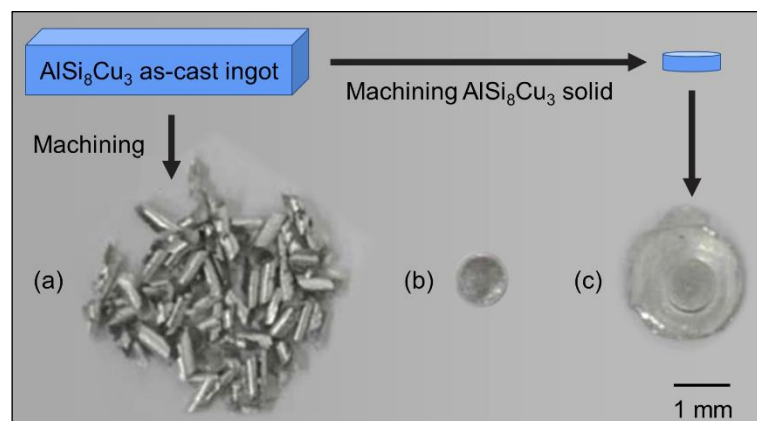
Macrographs of the (a) as-machined chip, (b) cold compacted chip sample, and (c) HPT chip sample samples. Adapted from [67].
